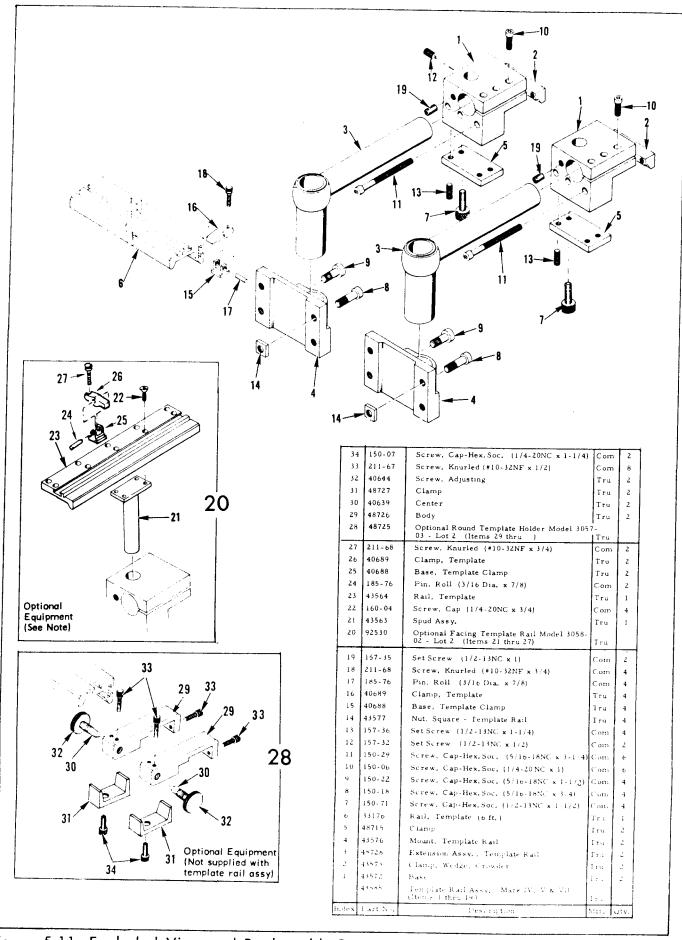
Exploded View and Replaceable Parts List for #43585 Universal Template Rail Assembly. (Used with Mark IV, V and VI Series)
